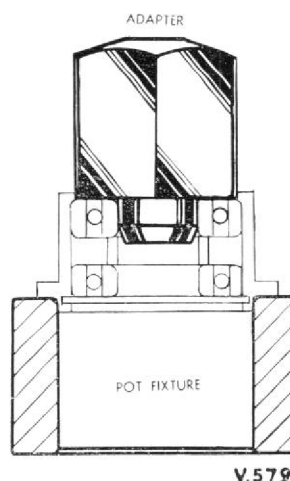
Pot fixture T.77752 and adapter T.77751 for removing ball bearings and spacer from port hydraulic pump gear housing.
